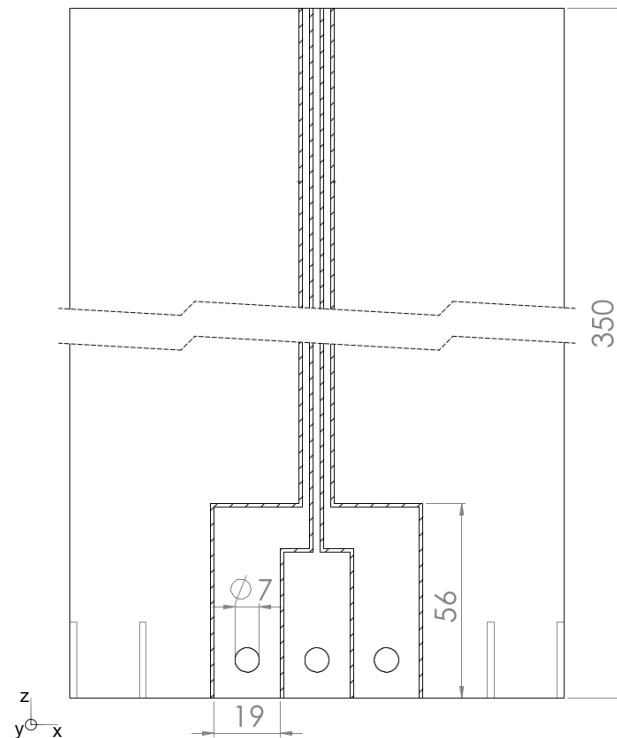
Burner cut side view technical drawing (dimensions in millimeters).
